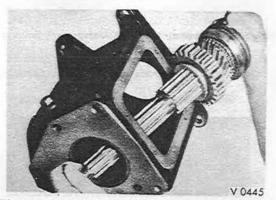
Removing the spline shaft with attached parts through the transmission case cover hole.
